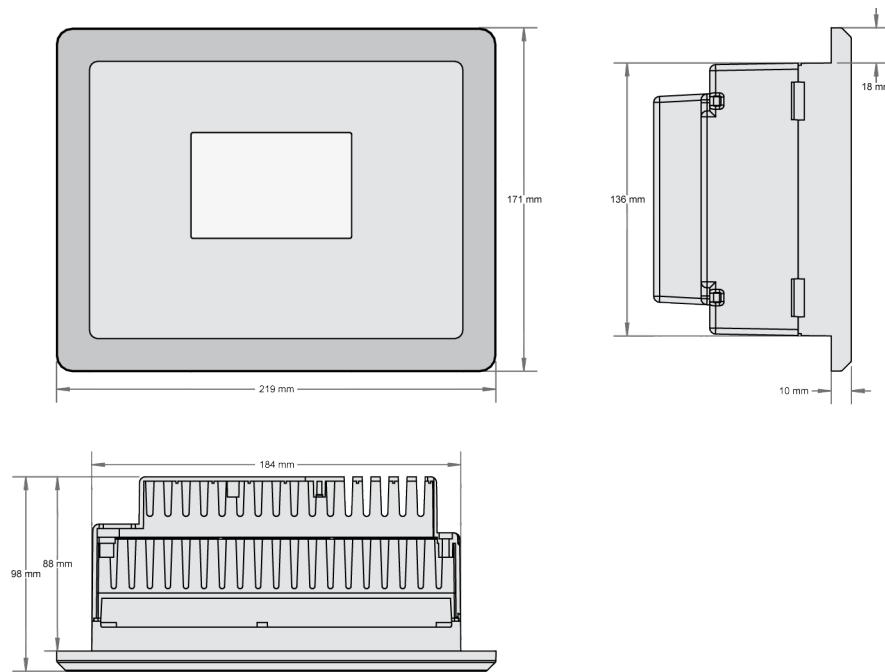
Plastic housing easYgen-2500 – dimensions
